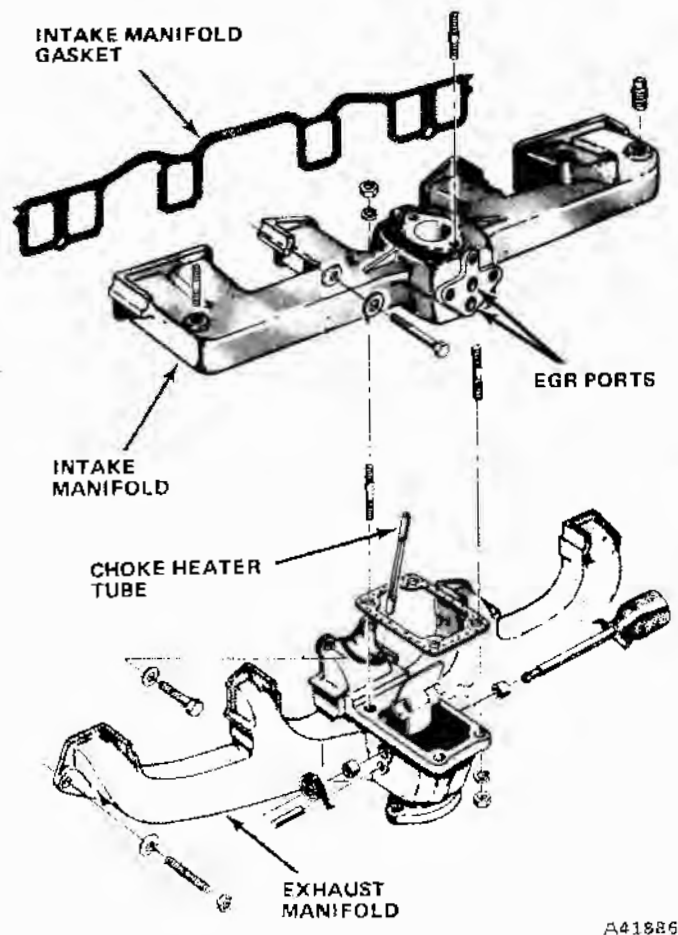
A-12 Intake and Exhaust Manifold Assembly
